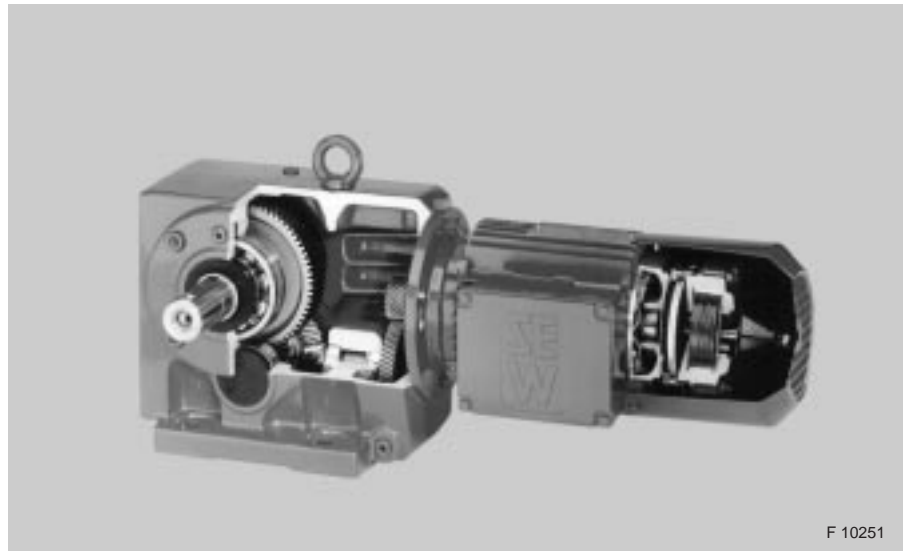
Three-stage spur/bevel/spur gear motor, oil lubricated
